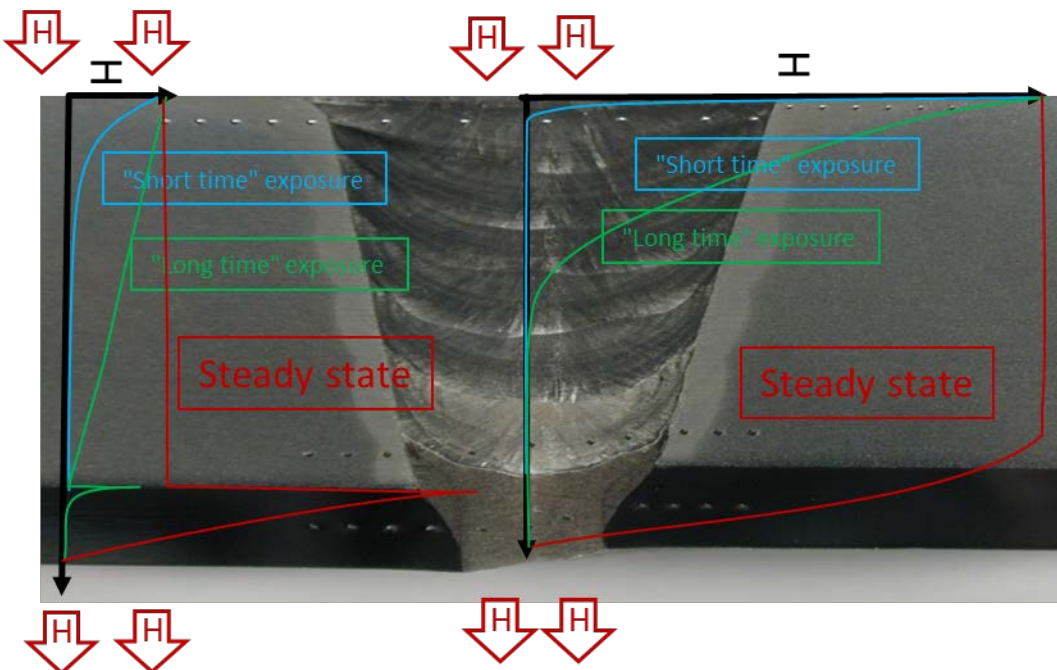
Schematic illustration of hydrogen charging of pipeline with a FCC clad, backing steel (BCC) and weld metal (FCC).
